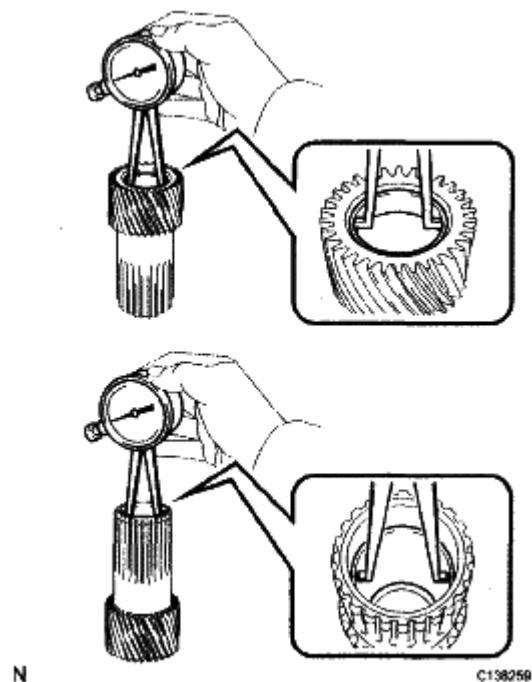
Measuring Inside Diameter Of Planetary Sun Gear
